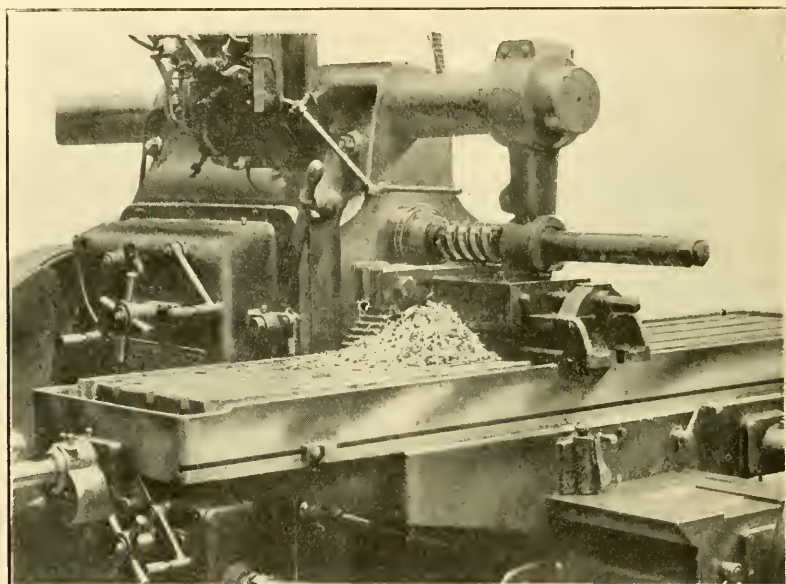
HELICAL CUTTER AT WORK ON STEEL TEST PIECES
